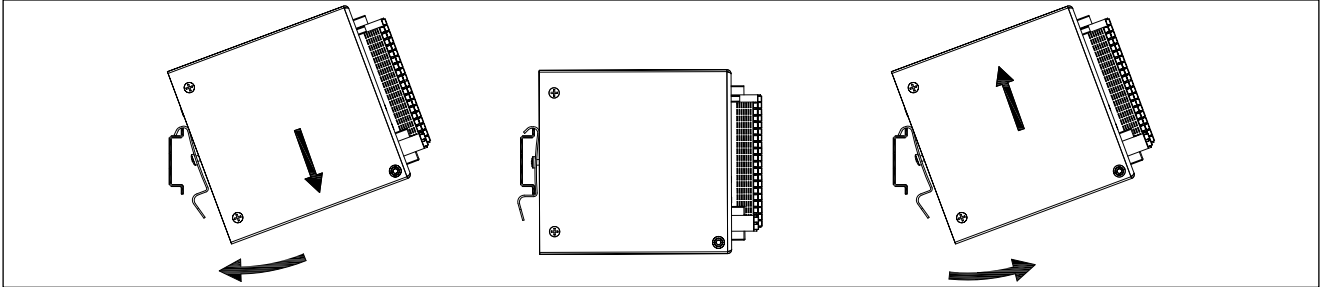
Assembly and disassembly from DIN rail 35 mm
